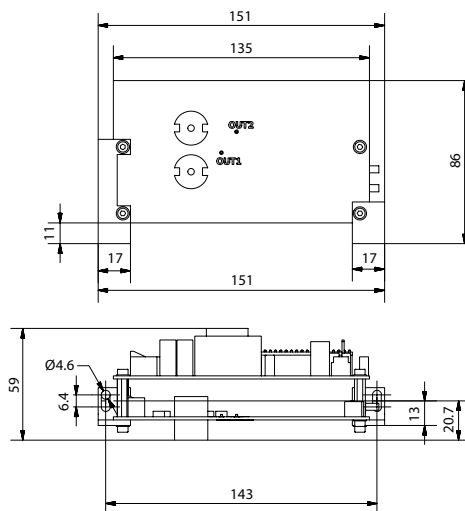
Outline drawing of OEM version DPB-3 and DPB-2.5 drivers with PS-5 power supply
